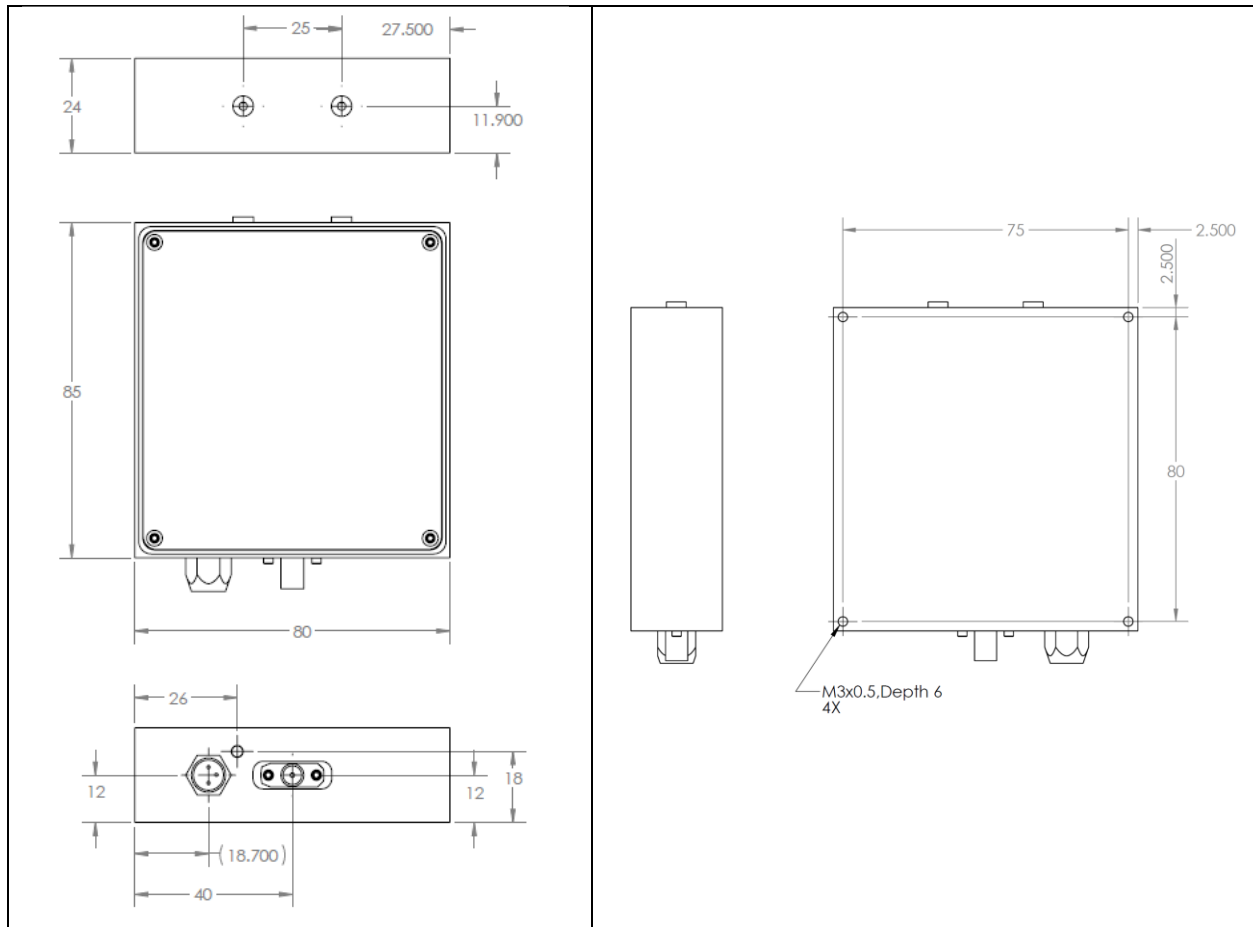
, Mechanical drawing of the balanced photoreceiver
